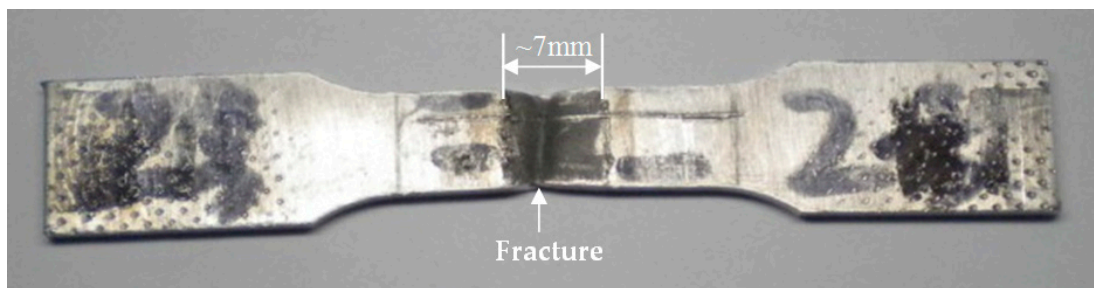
The appearance of FSW welded specimen after tensile test, showing the fracture was occurred in the gage section.
